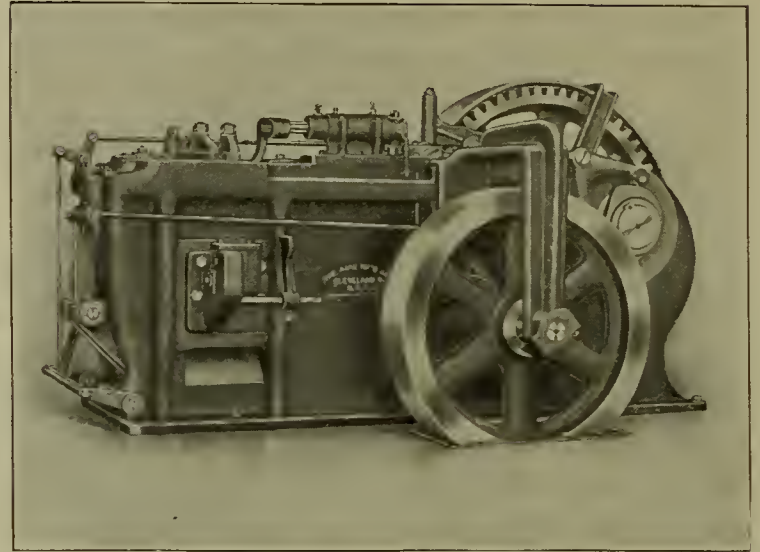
2-INCH BOLT HEADING, UPSETTING AND FORGING MACHINE, WITH RIVET ATTACHMENT.
